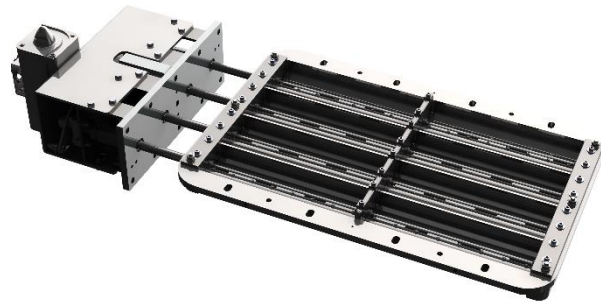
iSCR Exhaust Flow Control Valve (EFCV)
